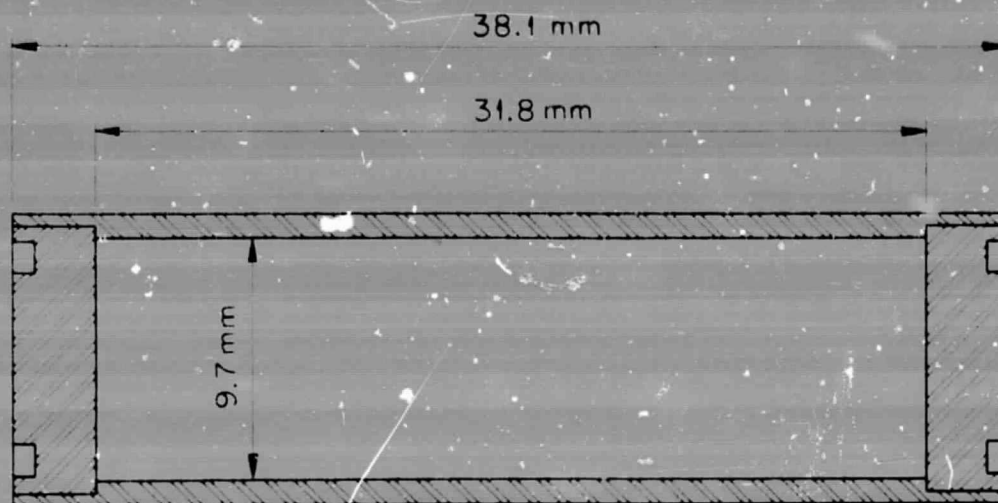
Ampoule assembly constructed of 1015 steel for B type specimen capsules.
